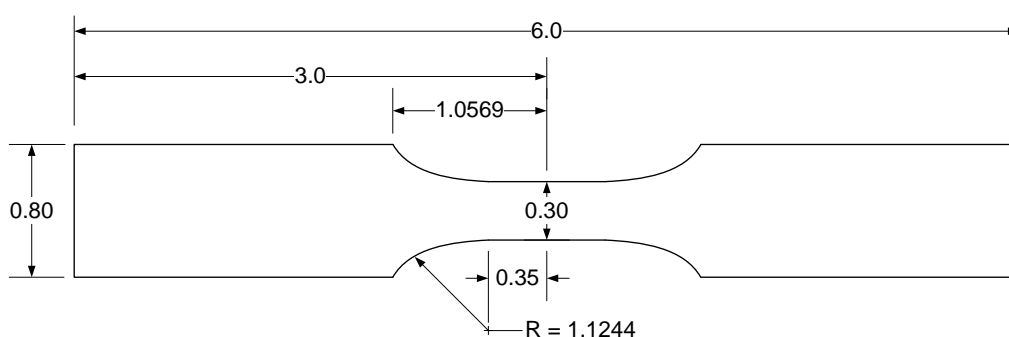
Tension-tension specimen geometry, all dimensions in inches
